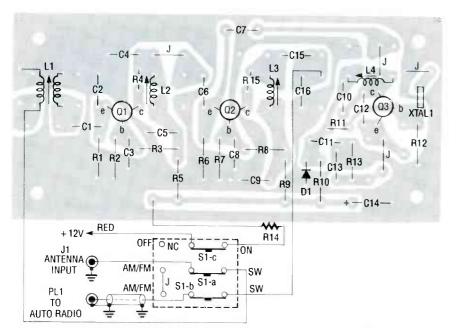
PARTS PLACEMENT IS STRAIGHTFORWARD. The copper pads are extra wide to accommodate coil forms of different sizes; drill an extra hole wherever your coils fit best.
